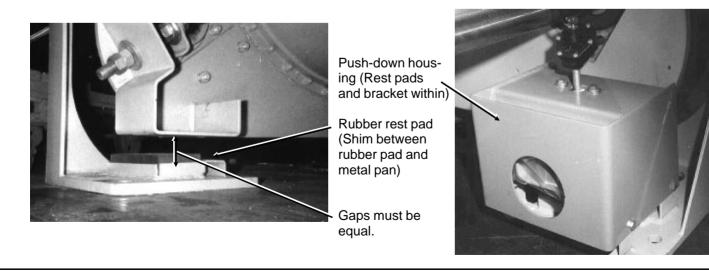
(MSSM0302AE) Push-down Travel Adjustment: 42" Div-cyls (42" Staph-guard[®] shown) 5. With the shell pushed down, attempt to pull each test shim out from between the bracket and rubber pad. The test shims should all be tight. If any shim(s) are not pinched tightly between the bracket and pad, take note of which one(s) are not.
